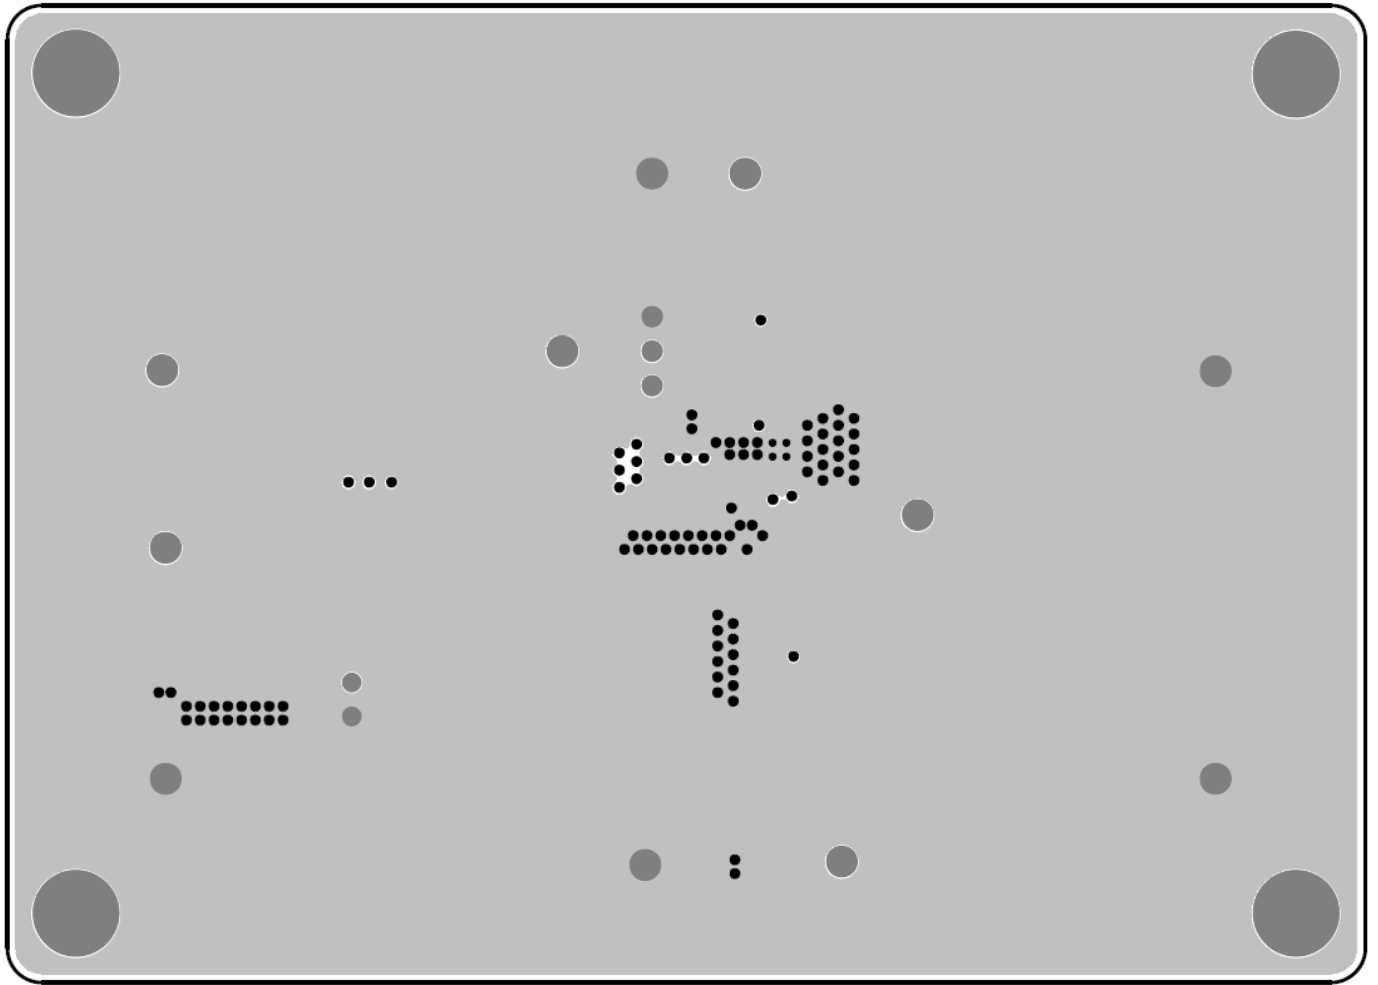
PCB Layout—Inner Side (2<sup>nd</sup> Layer)
